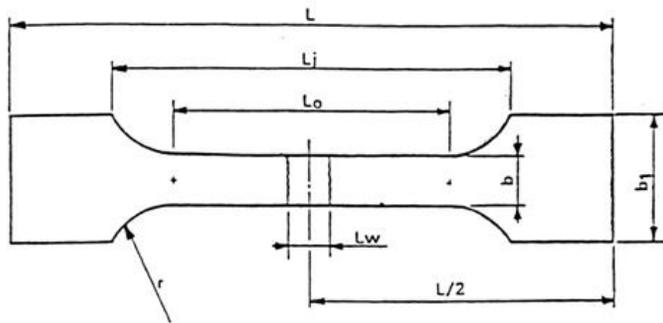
TYPICAL GEOMETRY OF DUMB-BELL TENSILE TEST SPECIMEN, AS DEFINED IN EN 12814-2
